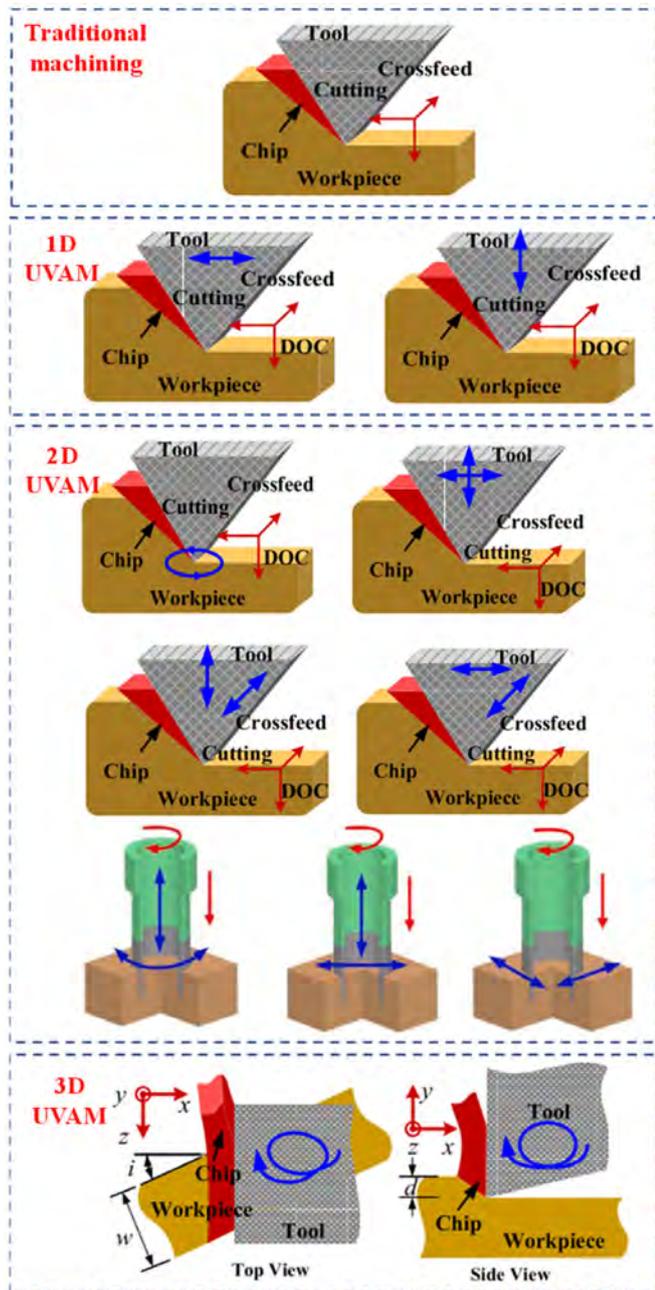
Three different categories of ultrasonic vibration-assisted machining [188].
